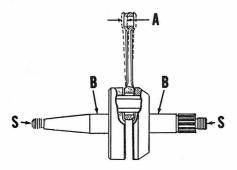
Support crankshaft on lathe centers at points (S) and place dial indi-cators at (B) to check runout.
